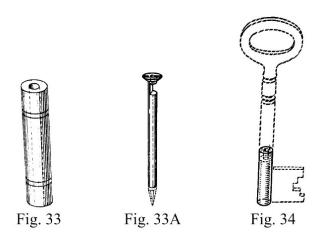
Facing Tool Fig. 33A – Facing Tool Made From a French Nail Fig. 34 – Showing Facing Tool Made From a Key
